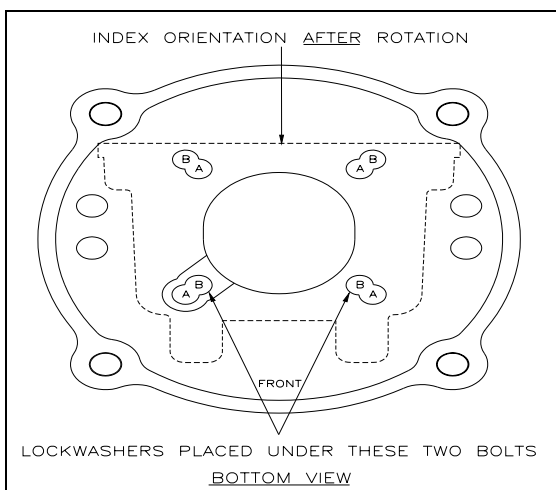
3 Base Plate Showing Unit & Index Rotation
